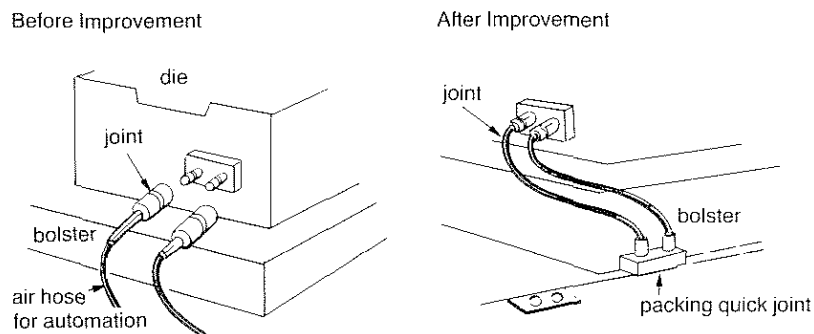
Improvement in the Attachment and Removal of Air Hoses for Automation
